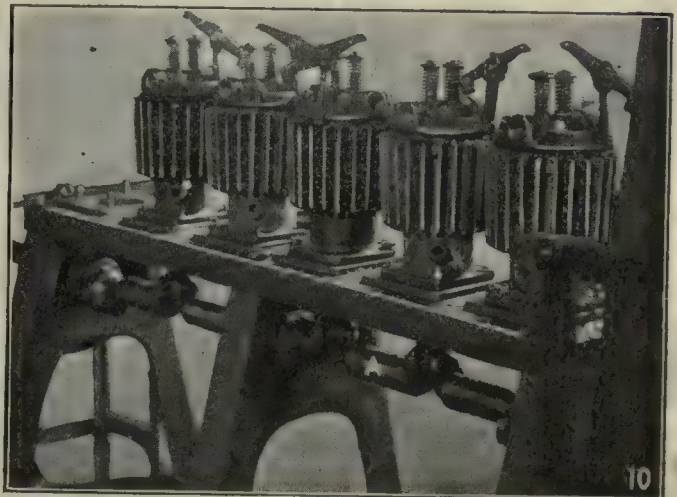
SPECIAL MACHINE FOR RUNNING IN BEARINGS
